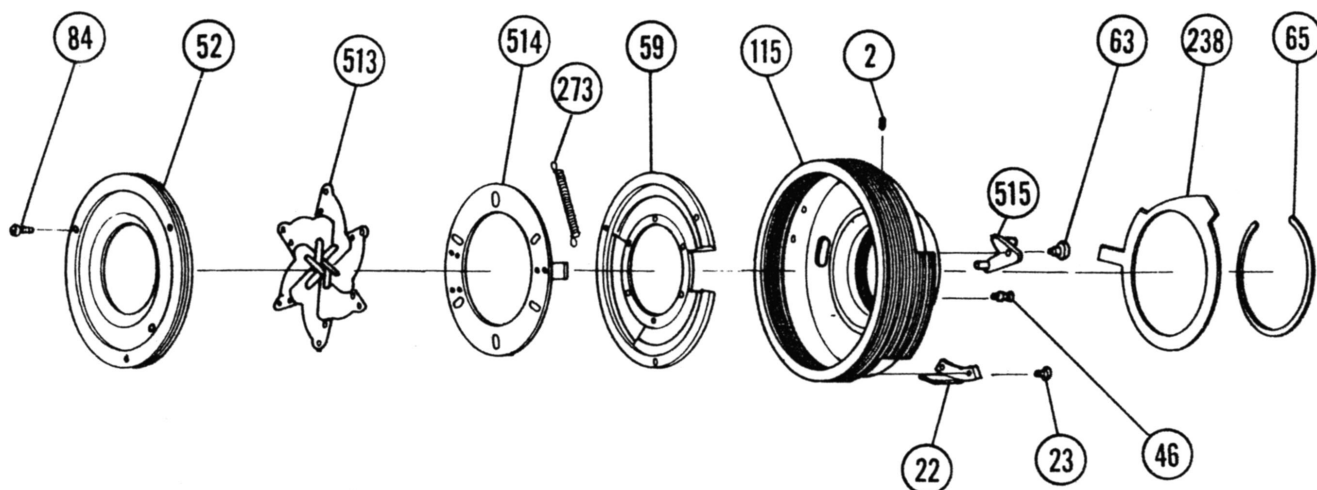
Diaphragm Housing Assembly, Minolta Mount
